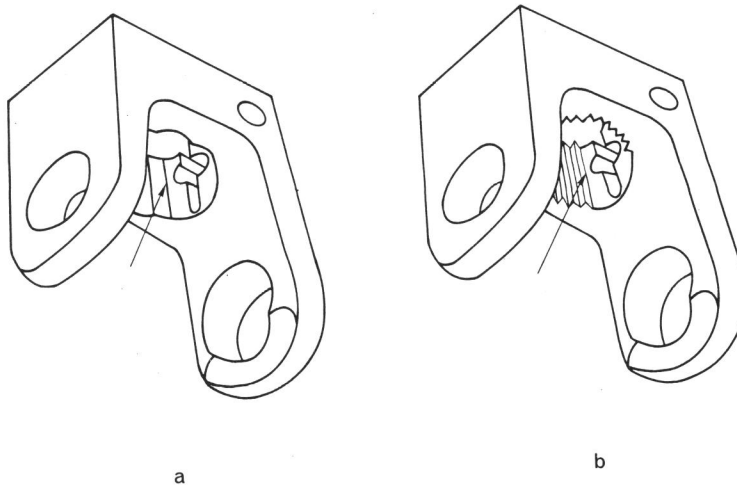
Sketch of cold forged AlMgSi universal joint; a) Smooth attachment hole and b) Serrated attachment hole.
